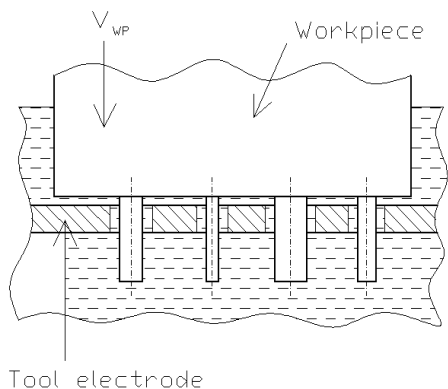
Obtaining small diameter external cylindrical surfaces by means of a plate tool electrode having small diameter holes
